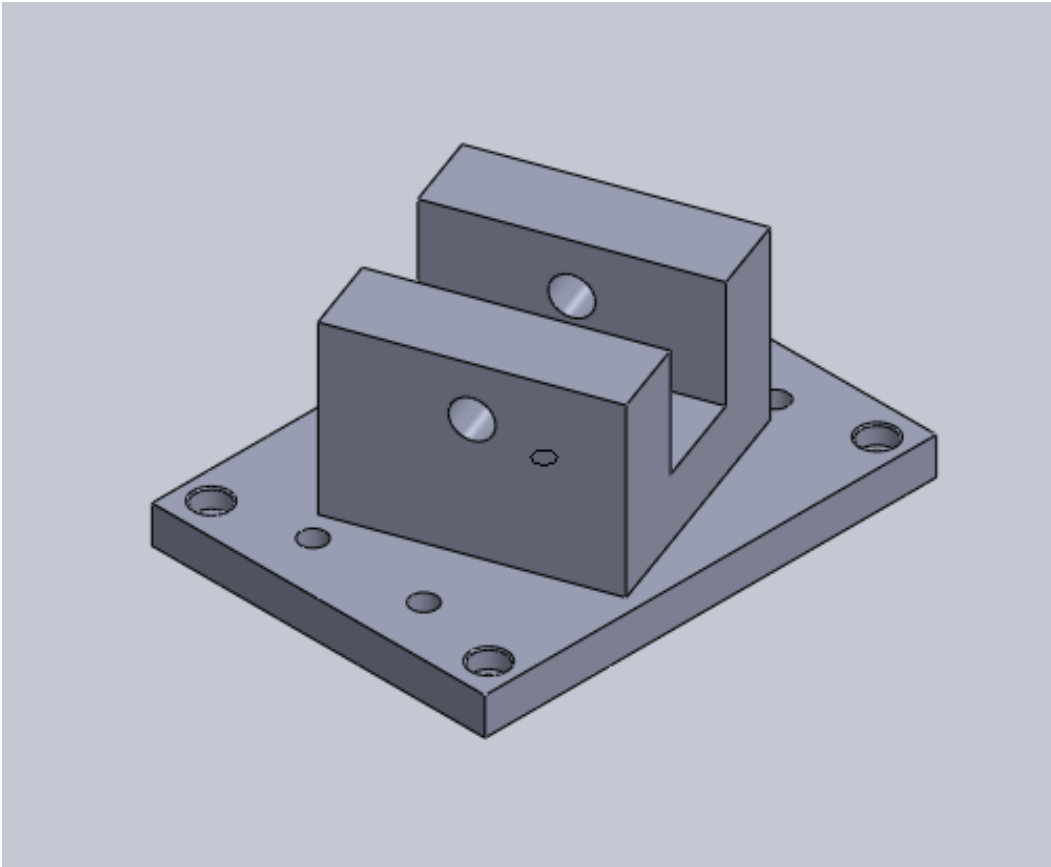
CAD as-built model of aluminum needle roller bearing clevis mount assembly
